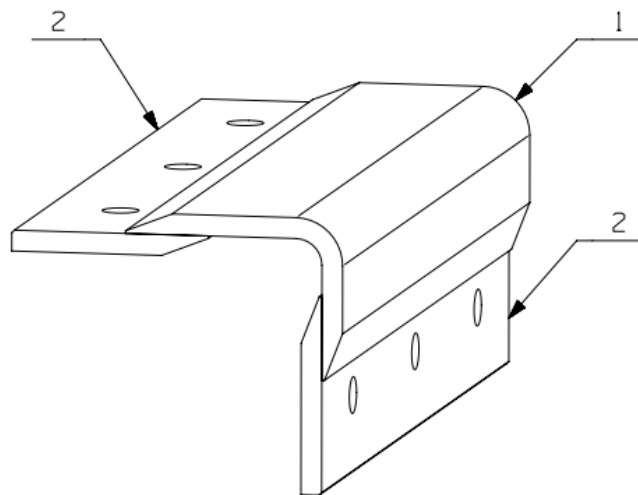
Final Design of the Demisable Cleat – Definition of Parts
